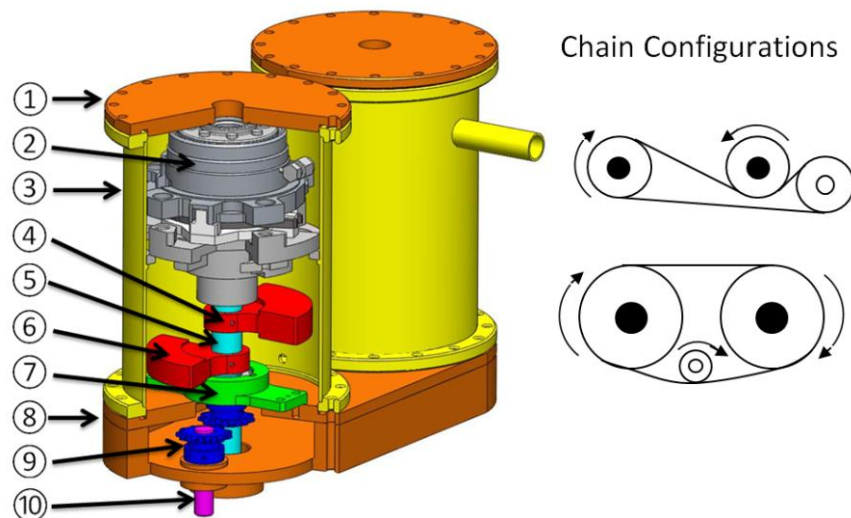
Partial section view of chain drive (left). Chain configuration 1 (top-right) and 2 (bottom-right). The wheels with the black center are the expander and compressor and the white center is the idler. The chain configuration of the section view is type 1.
